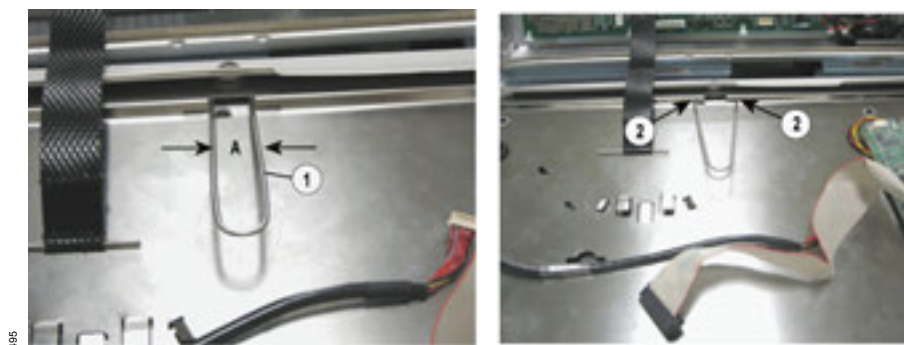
Detail view of operator control unit: Locking spring (lock position)
